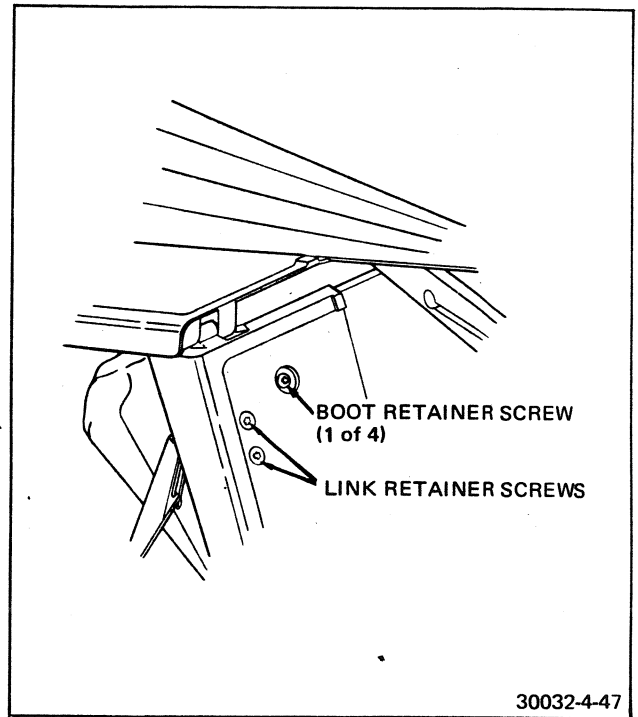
LOCATION OF BOOT LINK AND RETAINER SCREW
